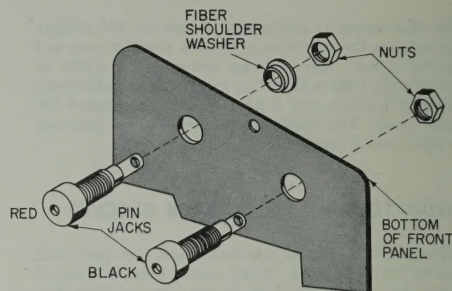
HOW TO MOUNT THE PIN JACKS
